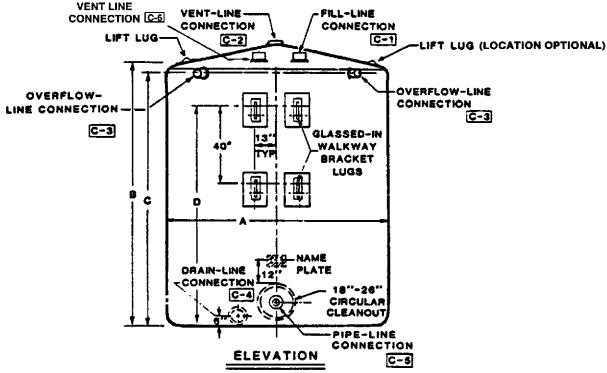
Closed Top FRP Tank Dimensions (See Table 1)
